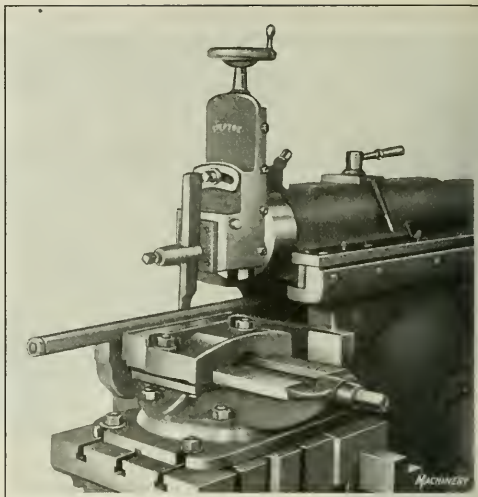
How the Shaper is used for cutting a Long Keyseat
